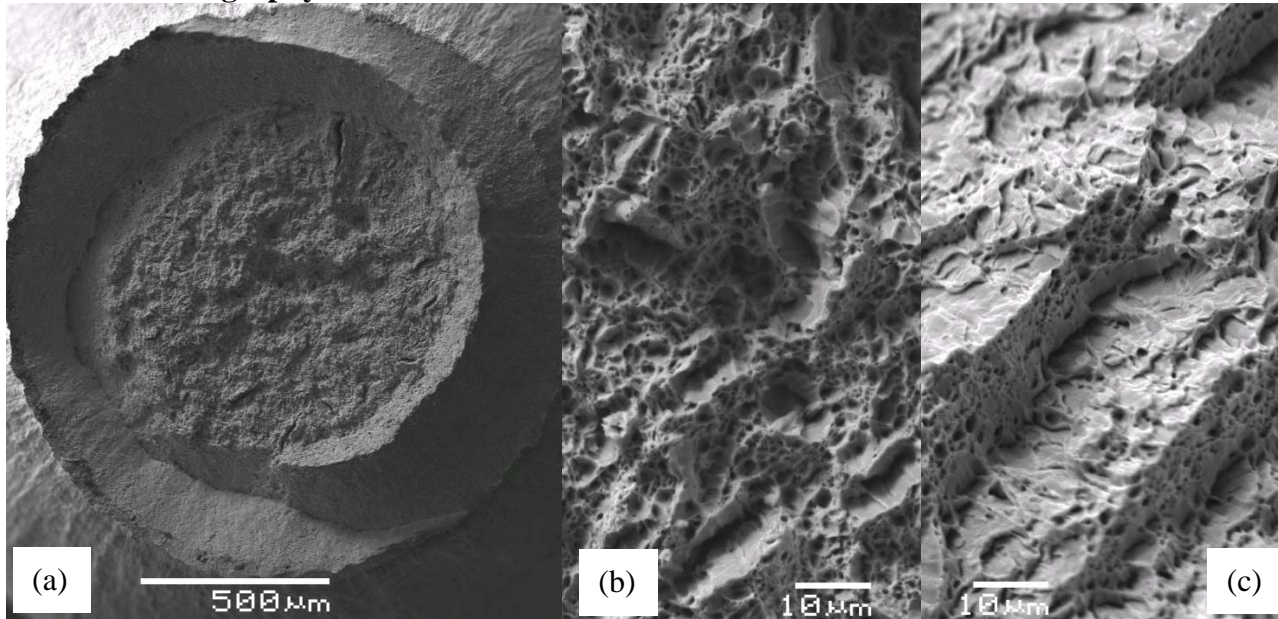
Specimen tested at an applied stress rate of  $0.02 \text{ MPa s}^{-1}$ : (a) overview of fracture surface of specimen A.02c, (b) a magnified view of cone part of specimen A.02c; and (c) brittle facets steps on the fracture surface of S0cp.02c.
